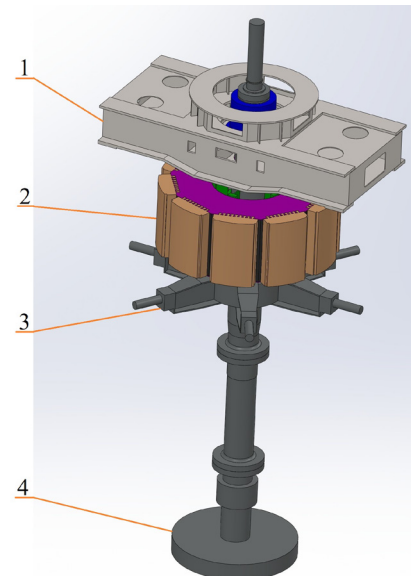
3D model of the structure of actual hydrogenerator-motor: 1 – upper crosshead, 2 – rotor, 3 – lower crosshead, 4 – turbine
